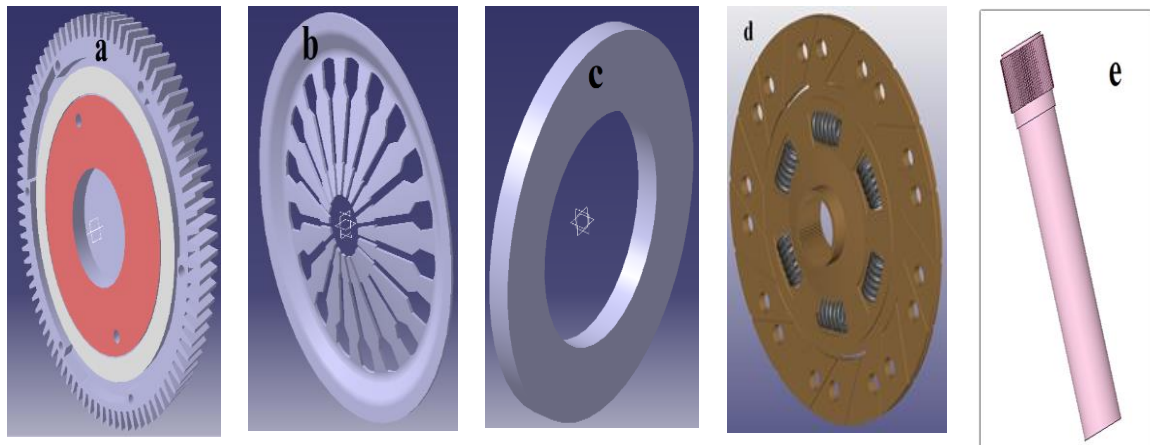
(a) flywheel (b) diaphragm spring (c) pressure plate (d) friction disc assembly (e) input shaft
